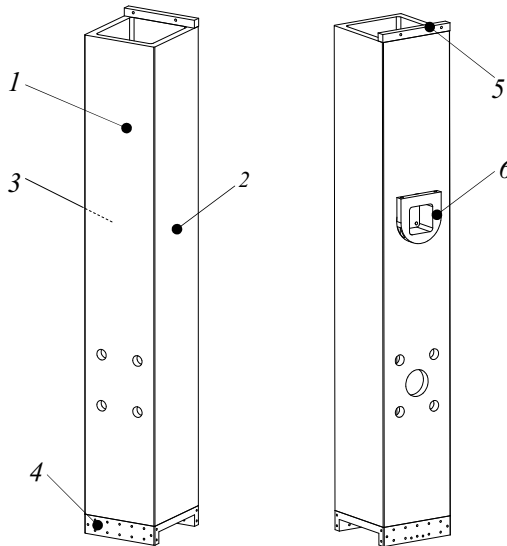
Z-stage Alumina tube with bonded interfaces
